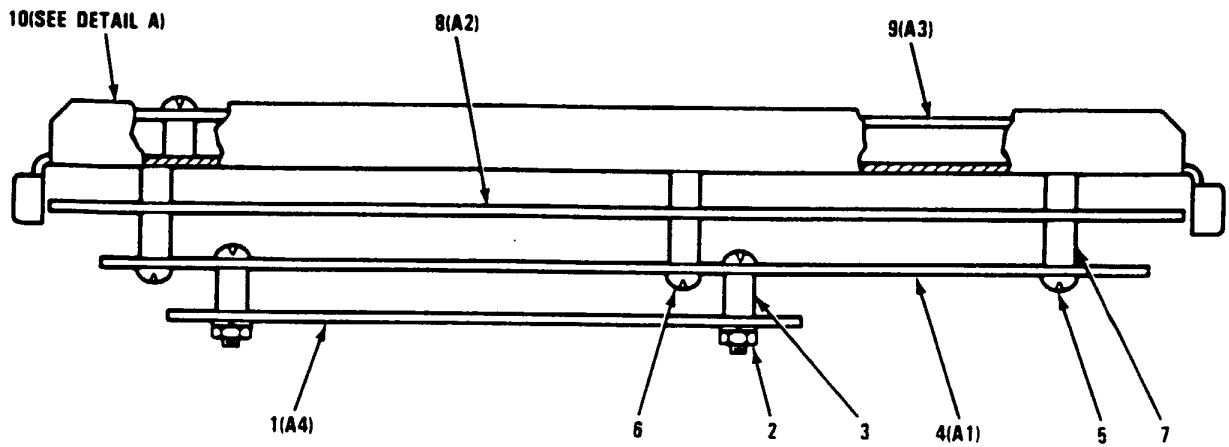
Modulator Circuit Card Assembly (Sheet 4 of 4)
